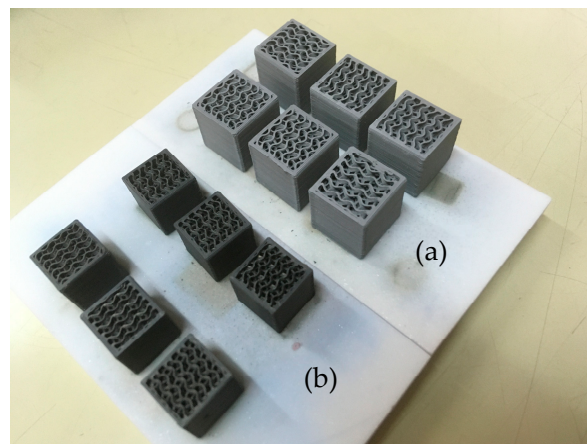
Top view of 3D printed parts before (a) and after sintering (b).
